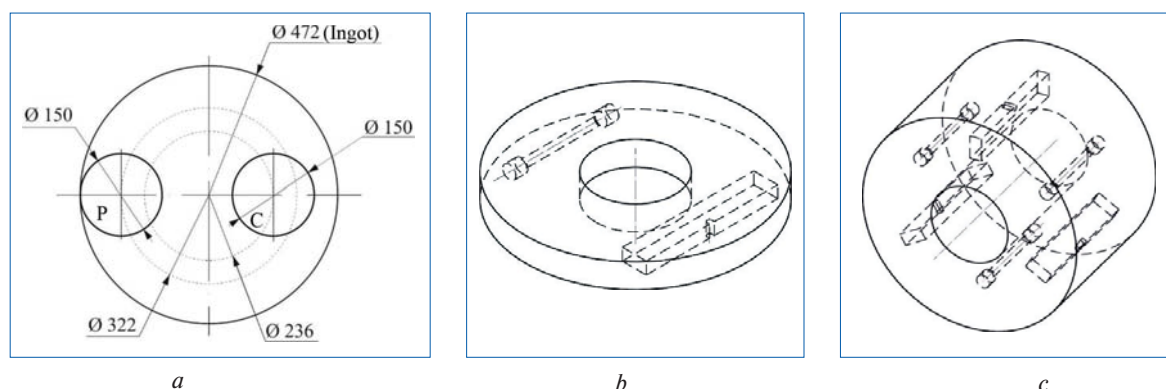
The scheme of samples cutting from the ingot (a), samples cutting for mechanical testing in tangential (b) and axial (c) directions (C – central ingot part, P – peripheral ingot part)
